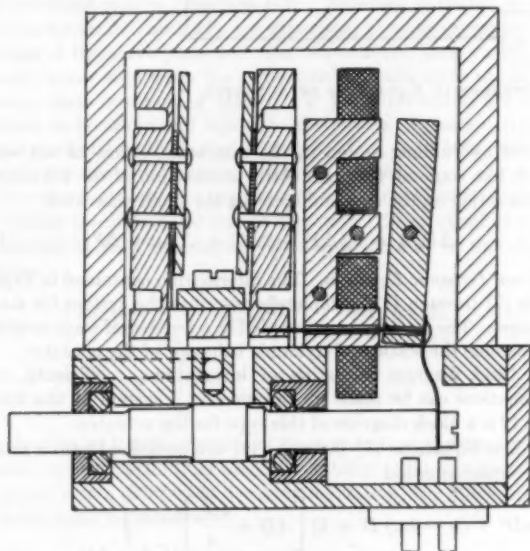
ASSEMBLY DRAWING OF ELECTROMECHANICAL TORQUE MOTOR
